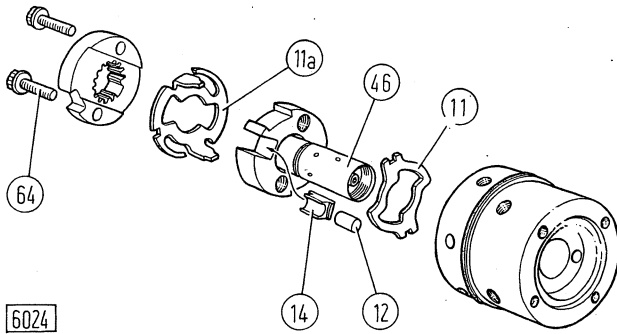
Assembly arrangement of the maximum fuel adjustment device on distributor rotor (46).
